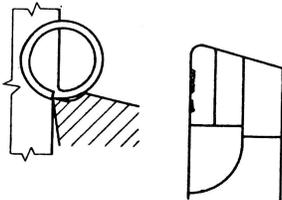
Damage to cutting edge by tubular chip.
